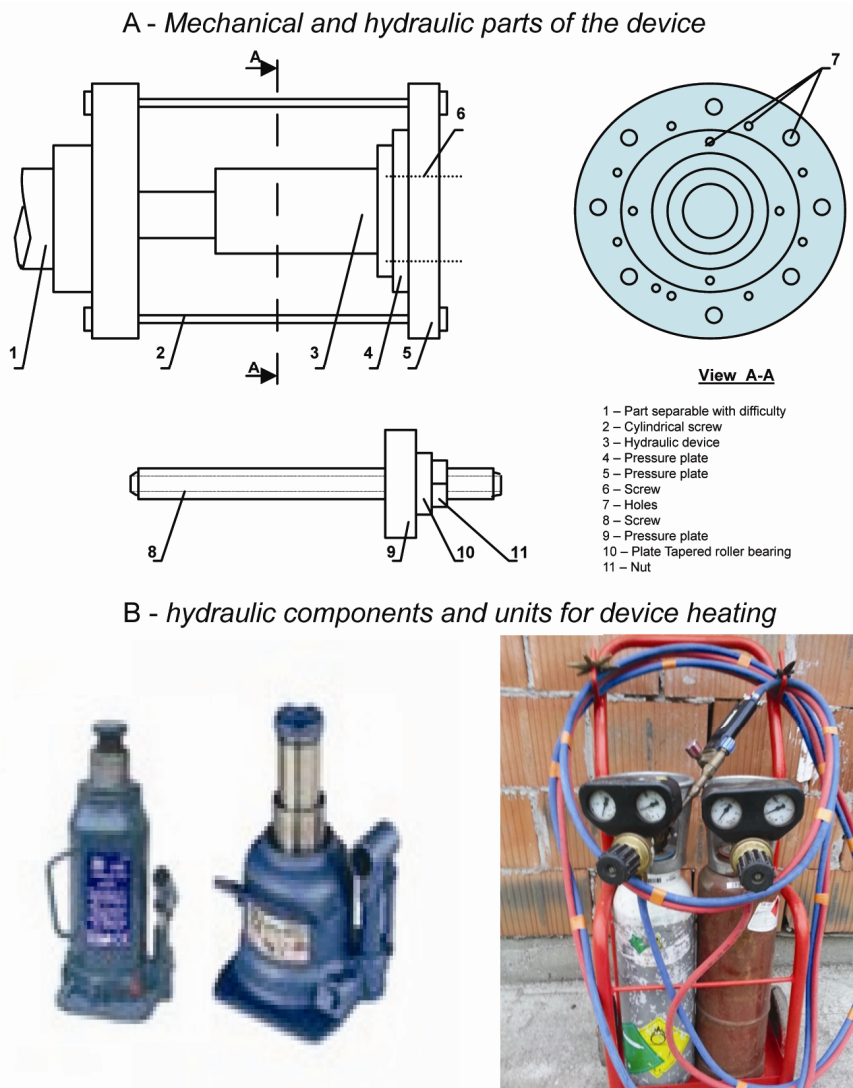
Device for dismantling and assembling not-easily detachable mechanical and electrical assemblies
